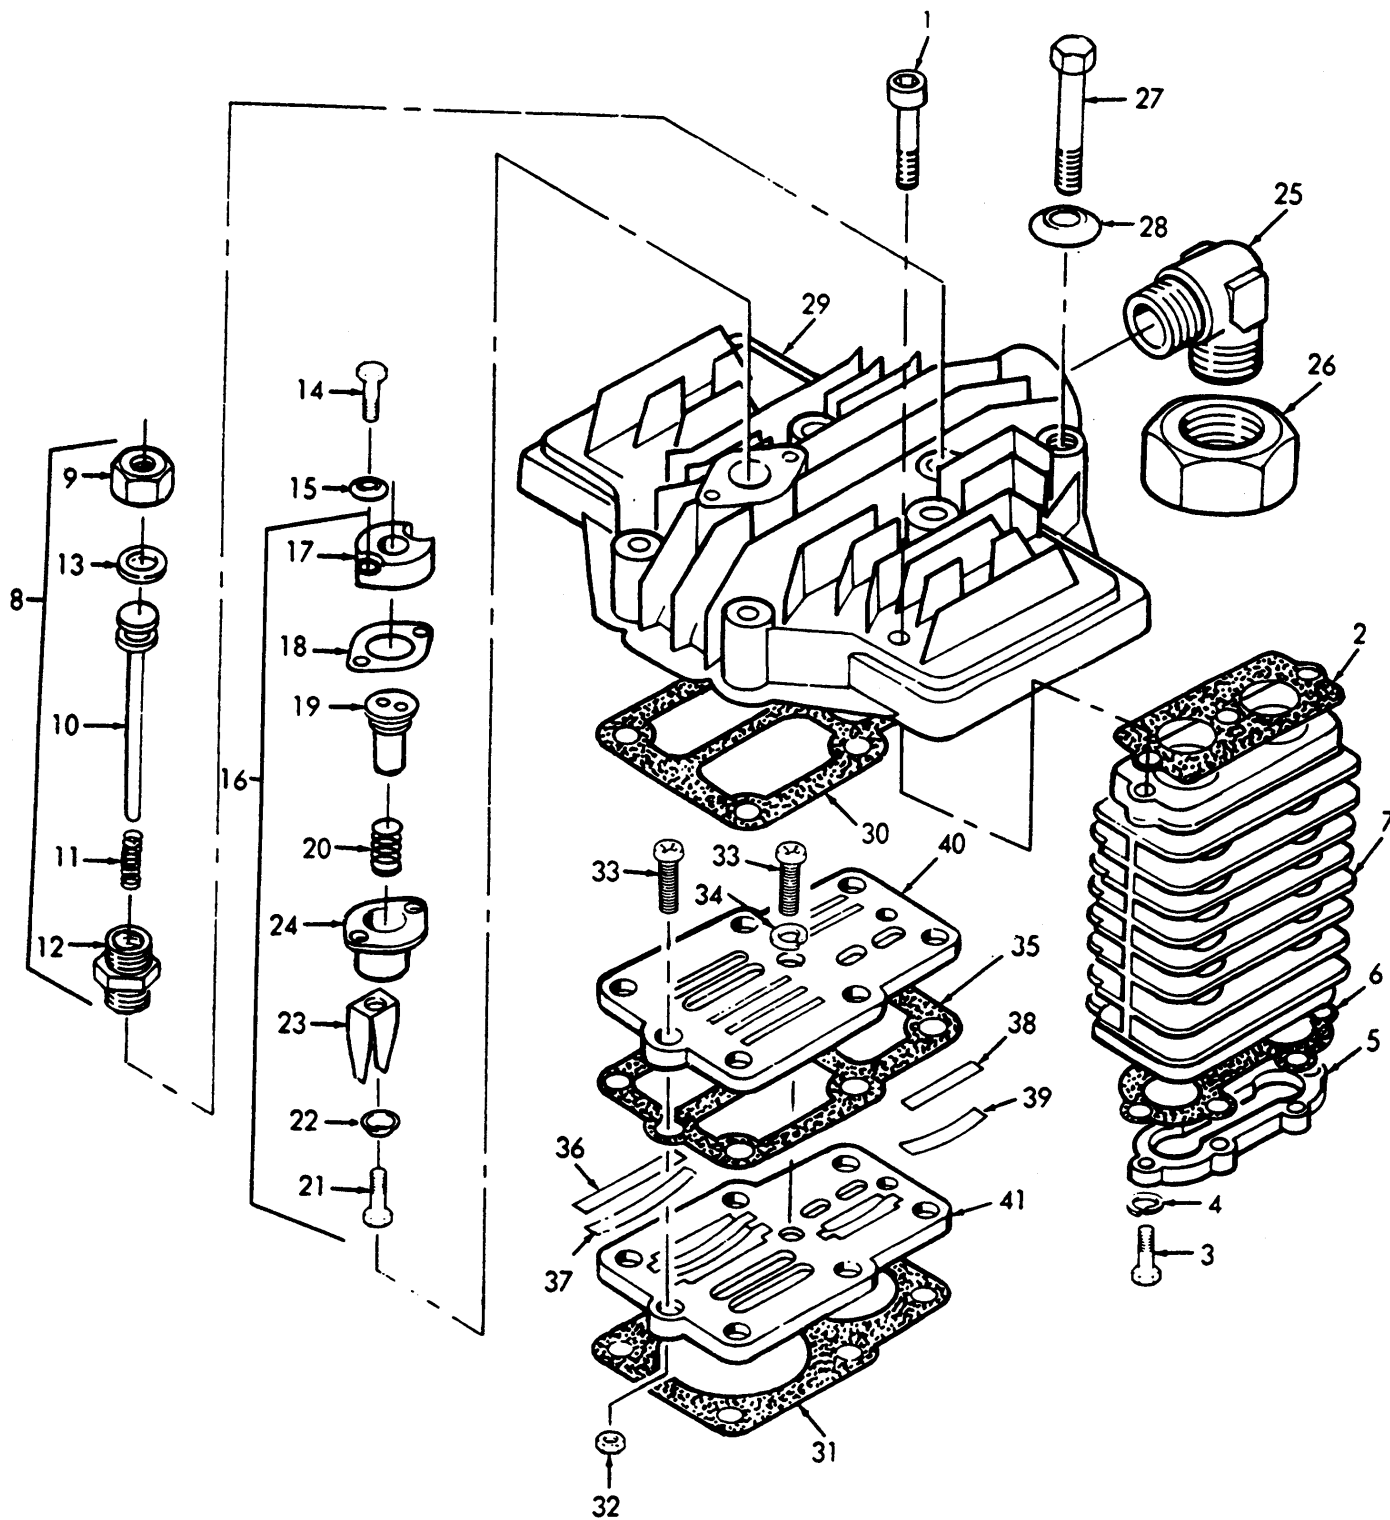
Valves; Intake and Exhaust, and Cylinder Head.
